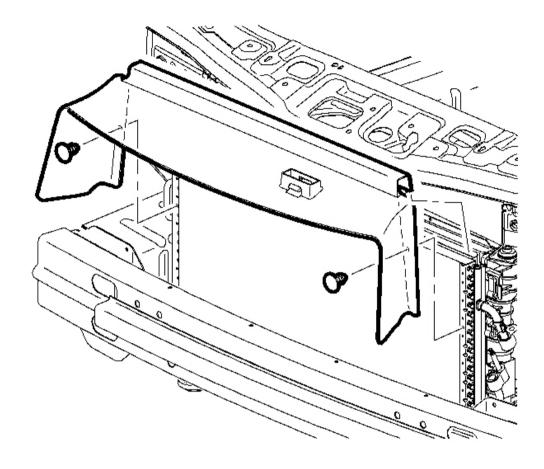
View Of CRFM Closeout Panel To The Condenser Courtesy of GENERAL MOTORS CORP.
